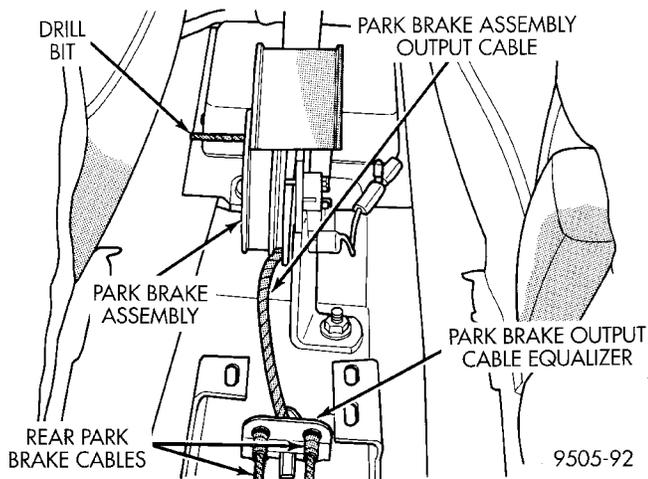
Park Brake Cables Properly Installed In Equalizer
